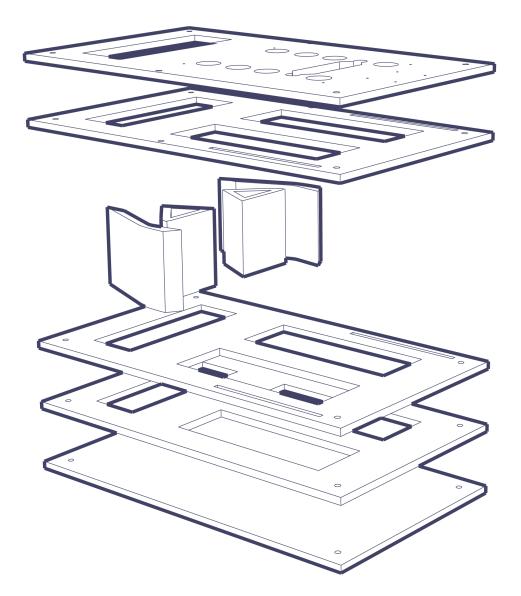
Exploded view of the structural elements, fabricated via laser cutting and 3d printing
